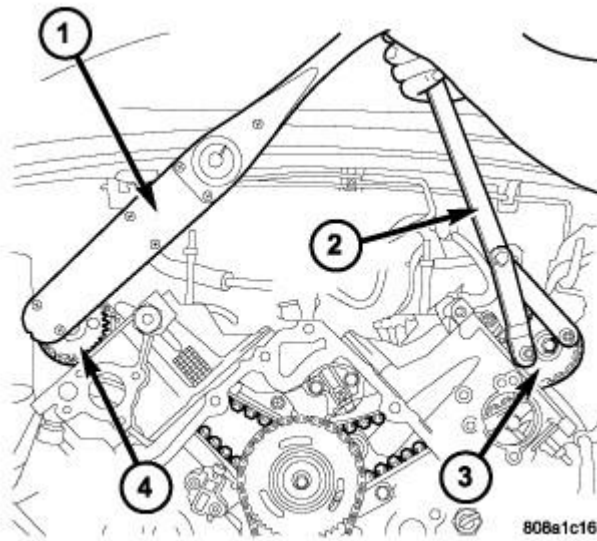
Tightening Right Side Camshaft Sprocket Bolt
